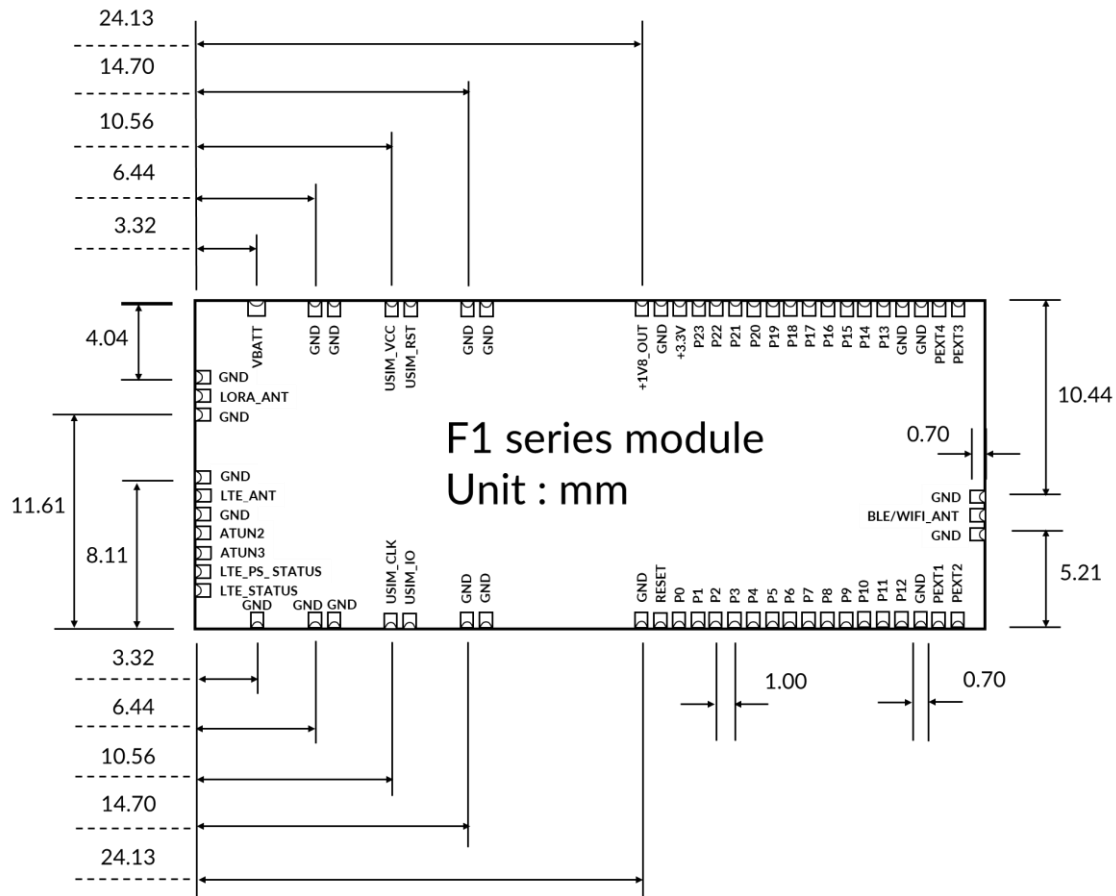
F1 Smart Module Pin Dimensions, Pin Pitches and Pin Locations (Top View)
